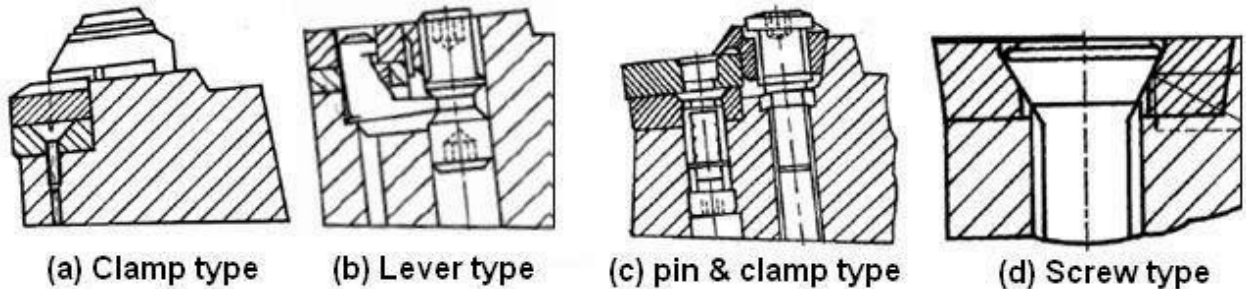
Mounting of tool inserts in tool holders by mechanical clamping
